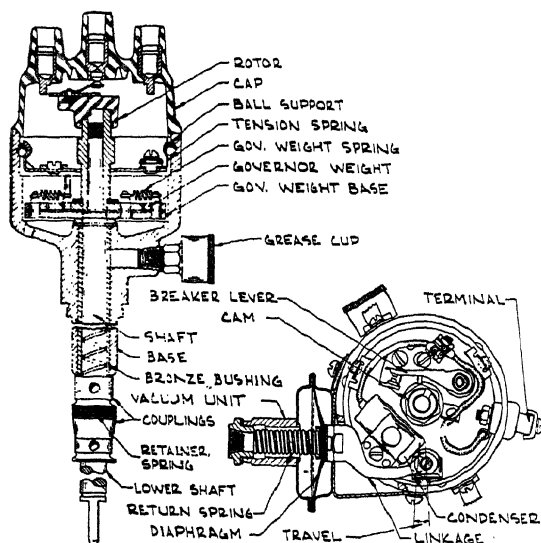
TYPICAL DELCO-REMY IGNITION DISTRIBUTOR
